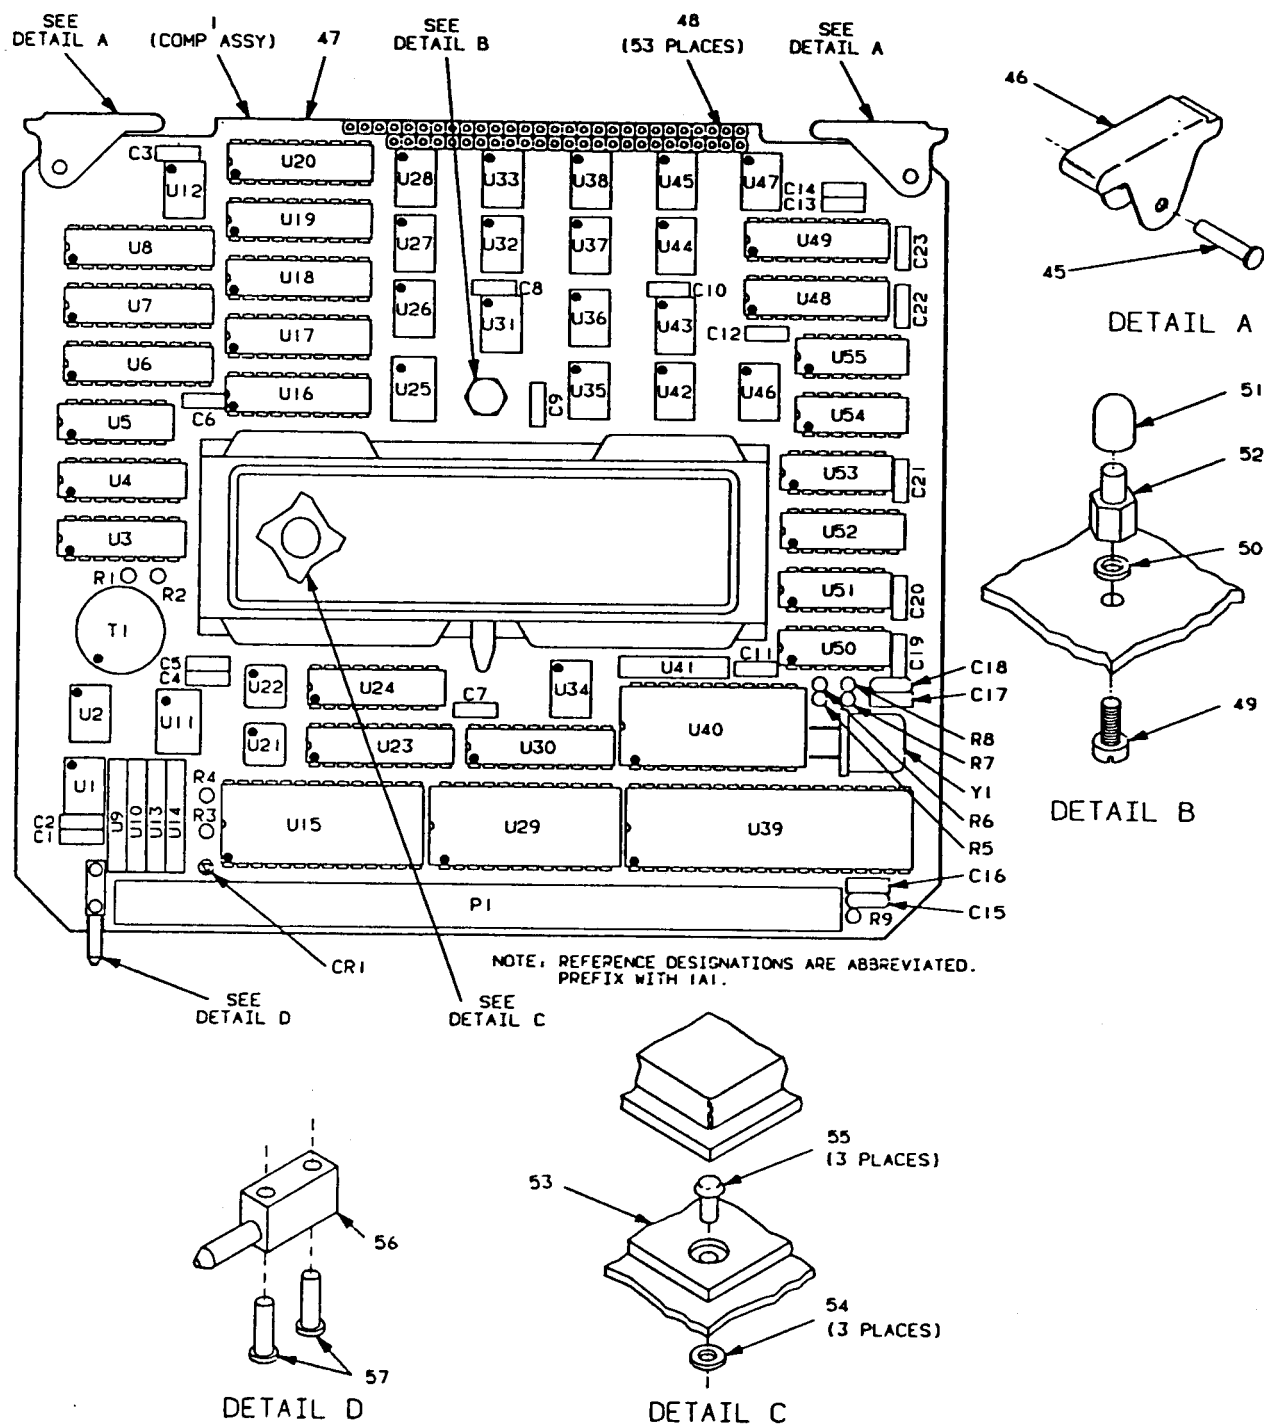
Circuit card assembly: display (1A1) (9379229-5)
